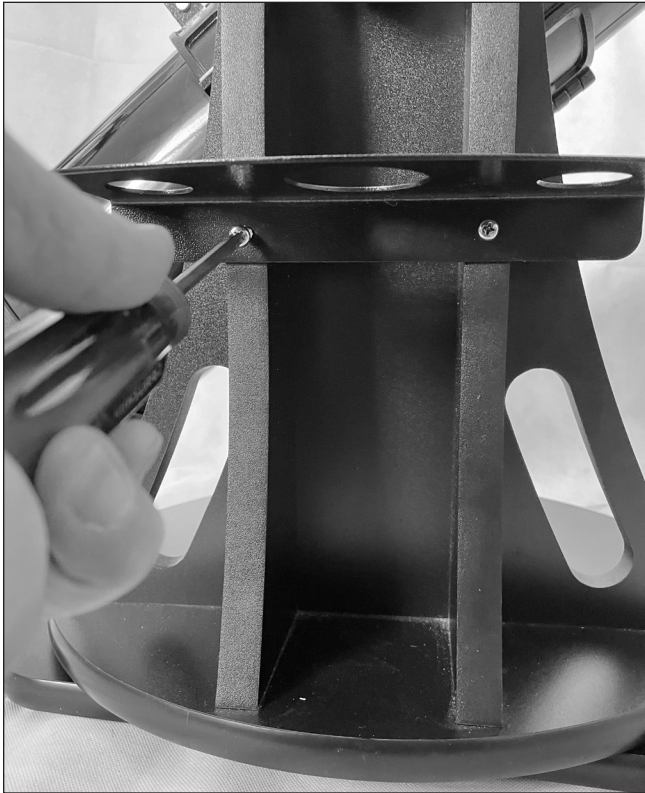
Find the pilot holes in the side braces of the base and attach the eyepiece rack with the two wood screws provided. You will need a Phillips screwdriver to do this.
